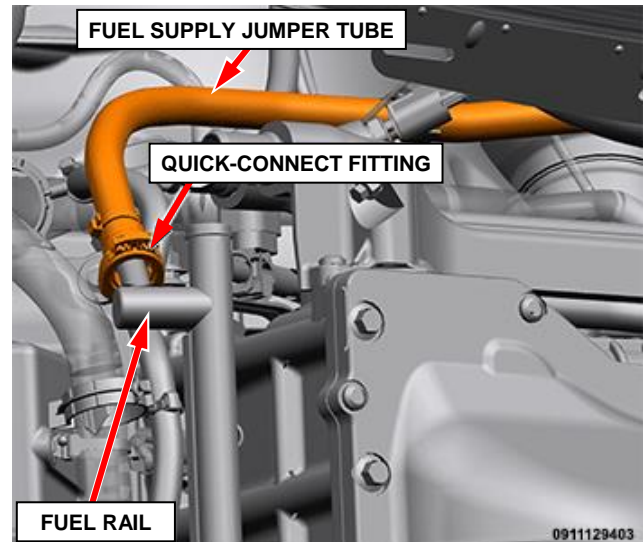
Fuel Supply Jumper Quick-Connect Fitting Right Side of Engine
